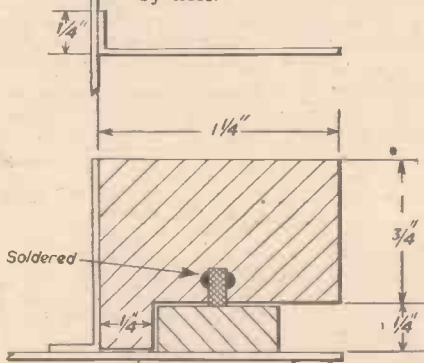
Method of cutting and mounting valve base screens in R.F. and mixer stages. (Material: thin tinplate.)
